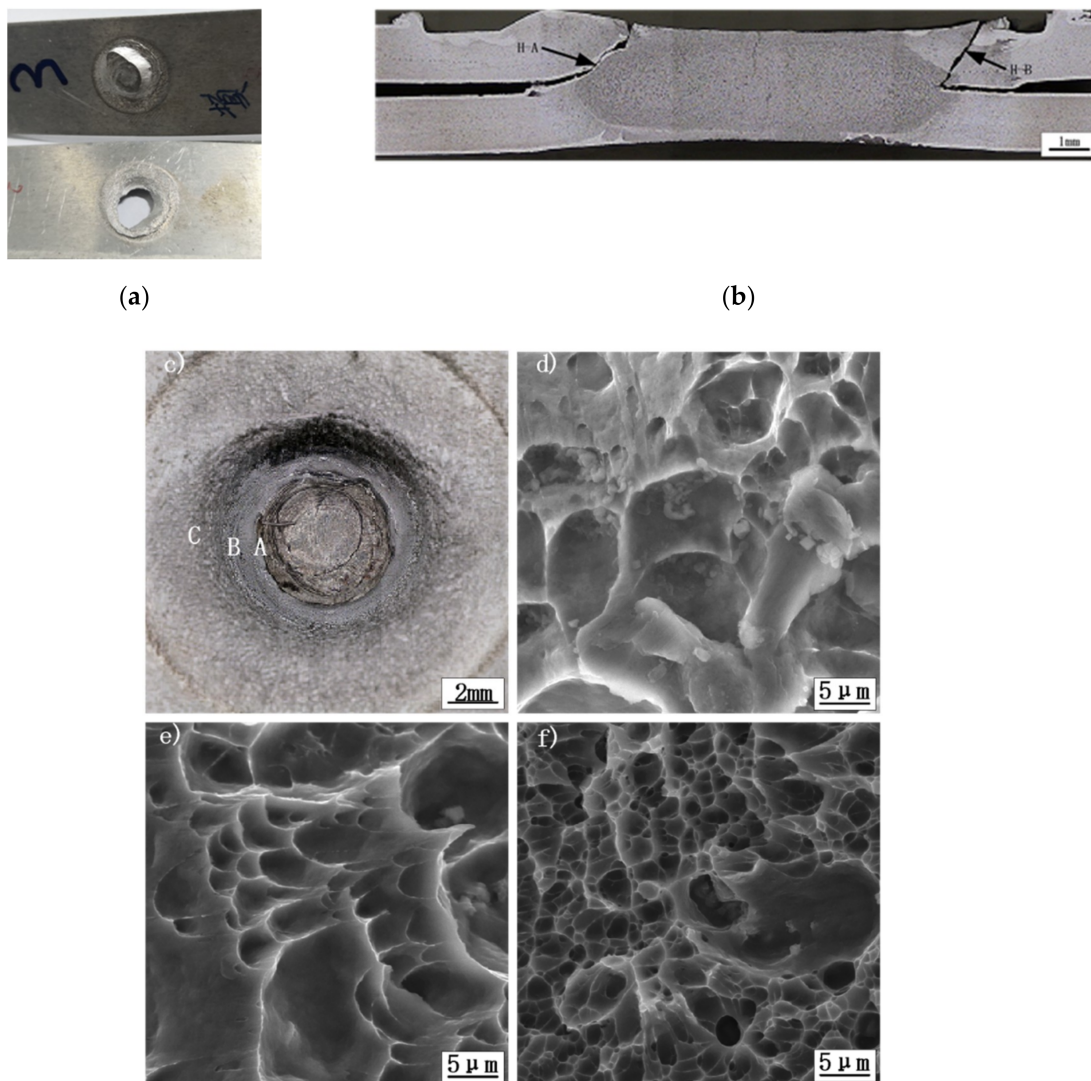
Fracture in refilled FSSW sample by RSW: (a) fractured specimen; (b) cross section of the fractured specimen; (c) SEM images of fracture surface on the bottom sheet; (d–f) magnified views in the zones A, B, and C in (c), respectively.
